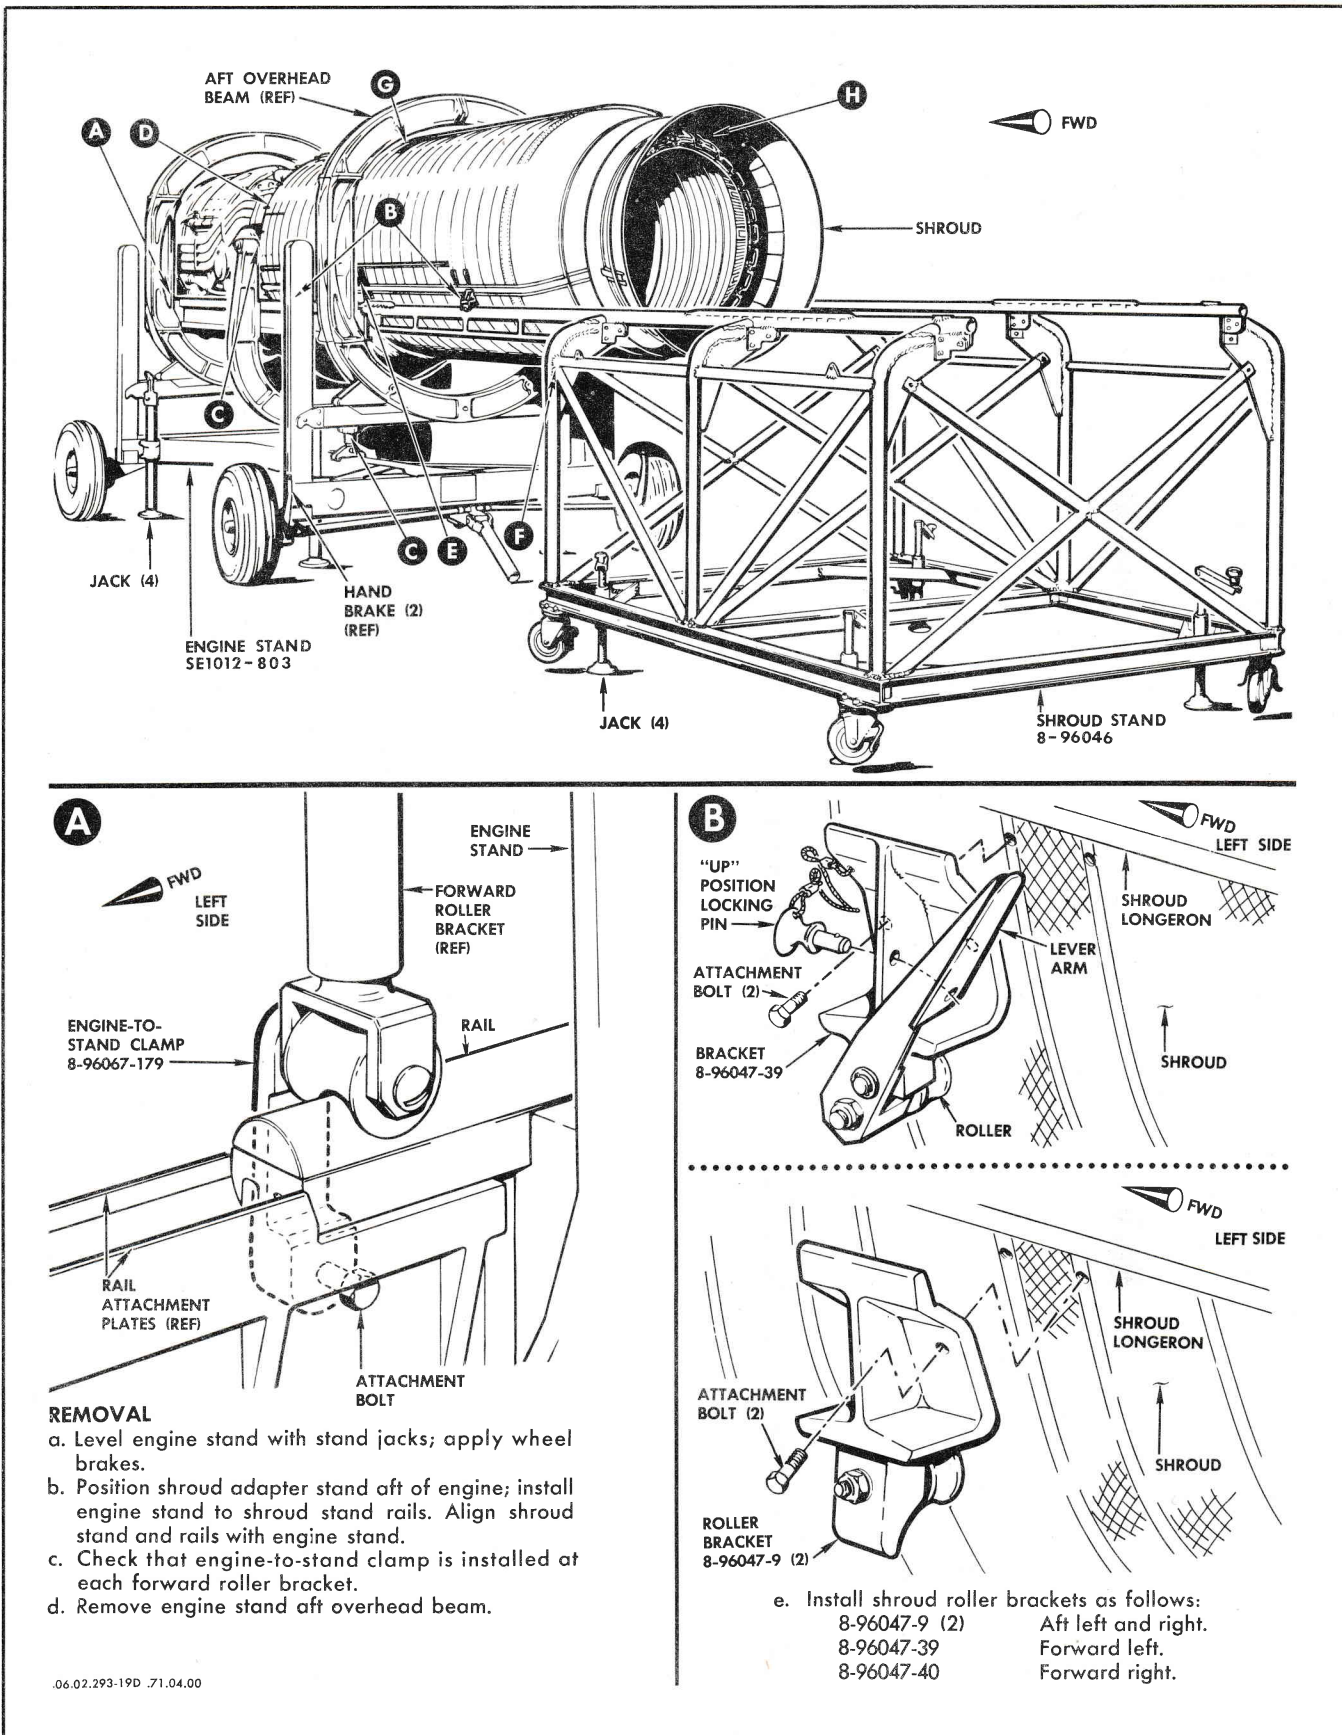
Replacement, Engine Shroud Using Stand SE 1012-803 (Sheet 1 of 3)
